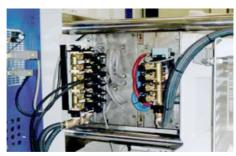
Thermographic control of the injection molding process – the injection mold.
